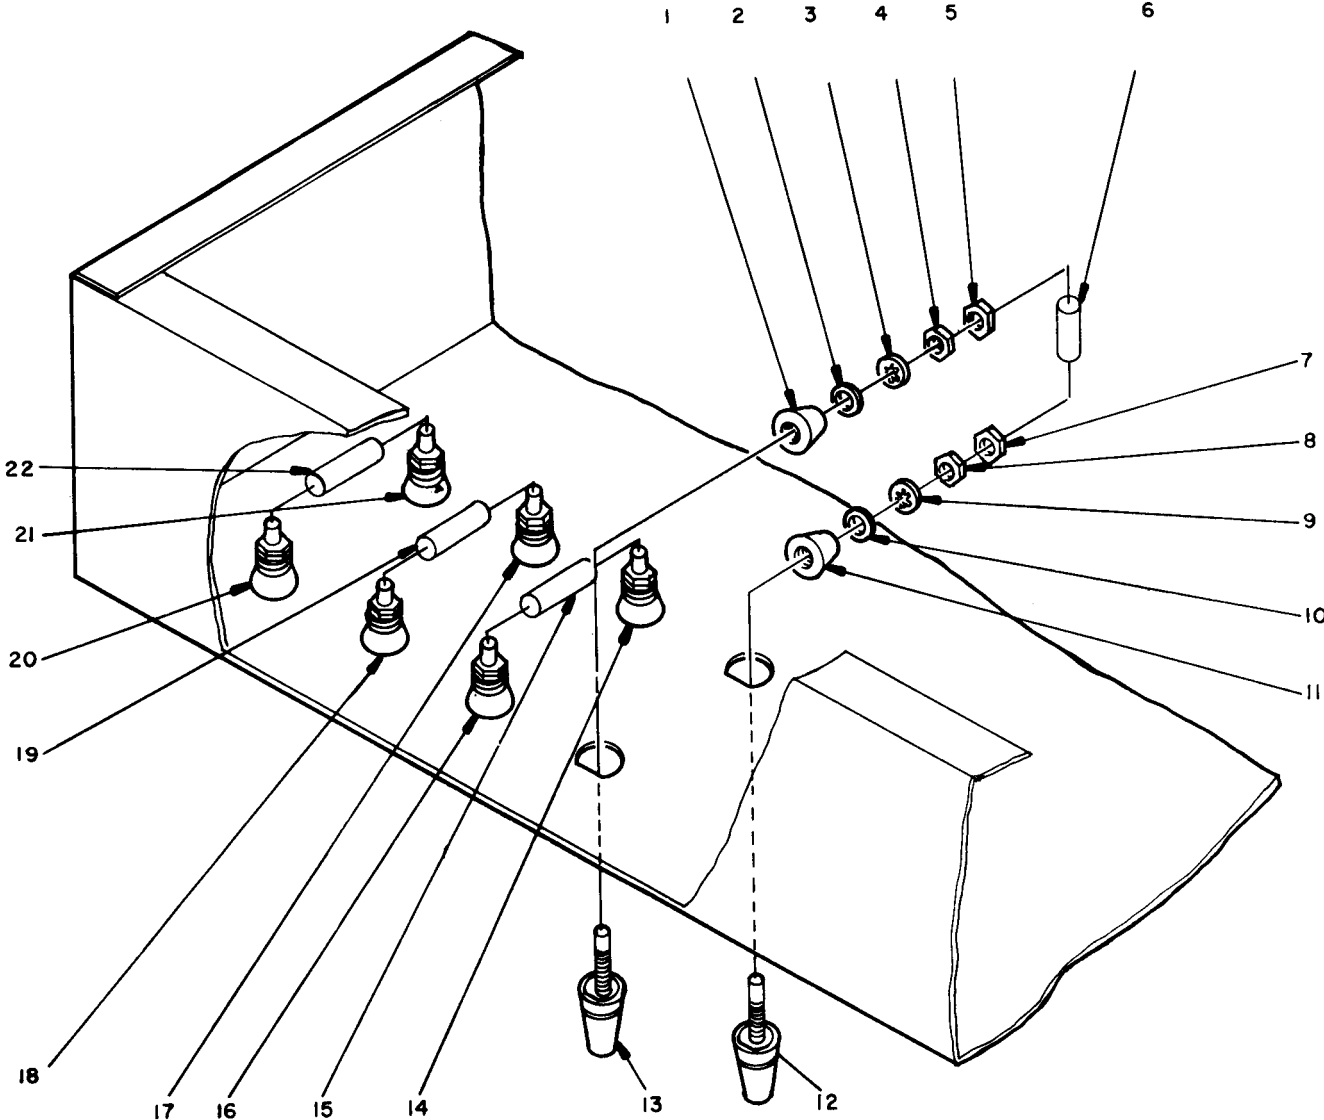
INTERFACE ASSEMBLY TEST FIXTURE (BOTTOM VIEW).
